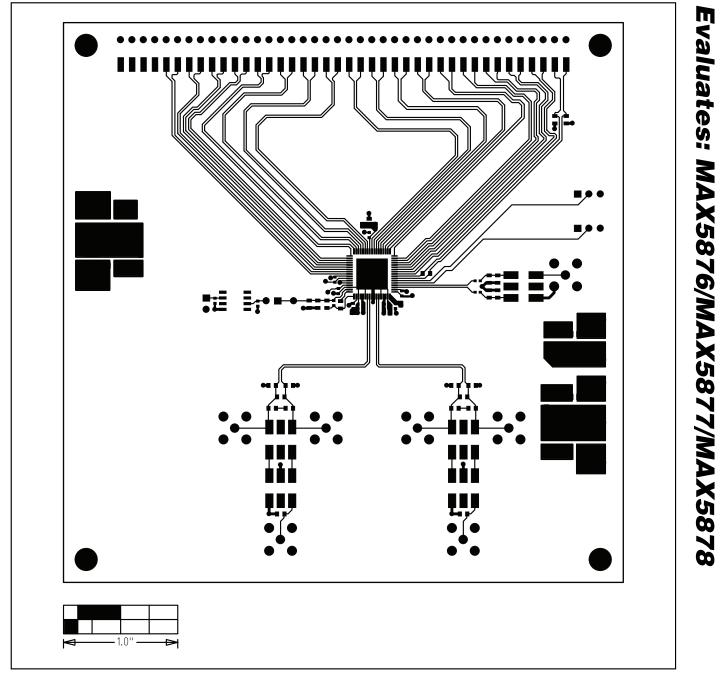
MAX5878 EV Kit PC Board Layout—Component Side (Layer 1)
